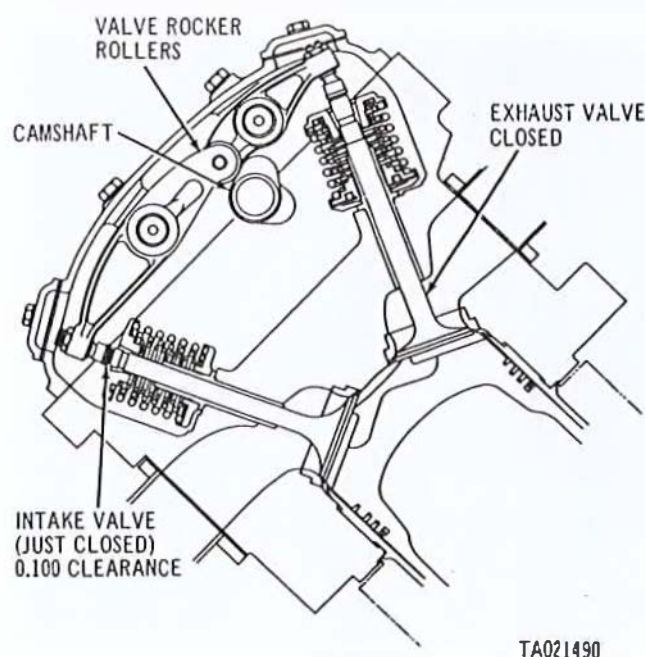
Cross section of cylinder 6R showing position of camshaft lobes for valve timing.
